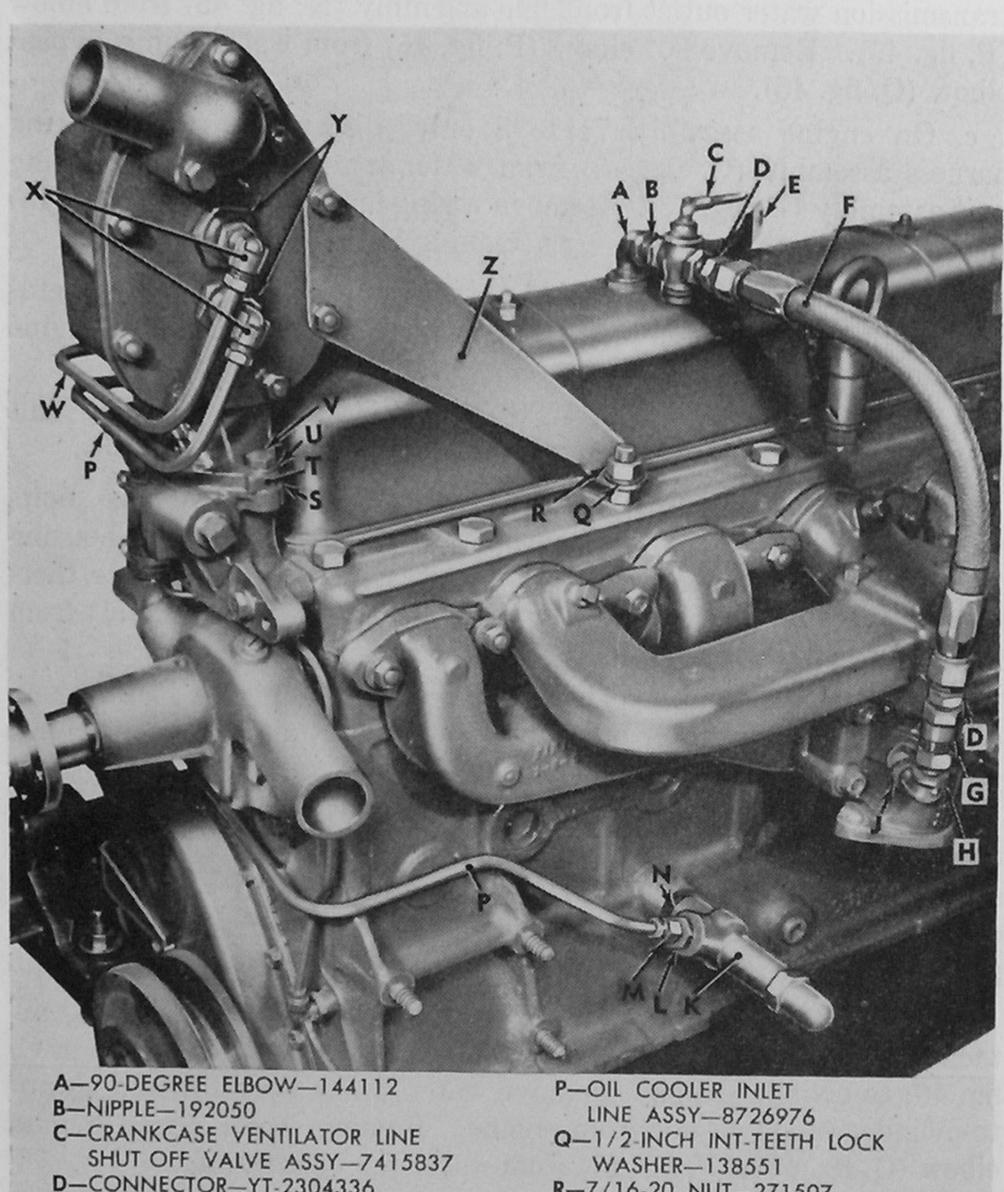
Crankcase ventilator line and valve installed—engine assemblies 7411599 and 8329440.
